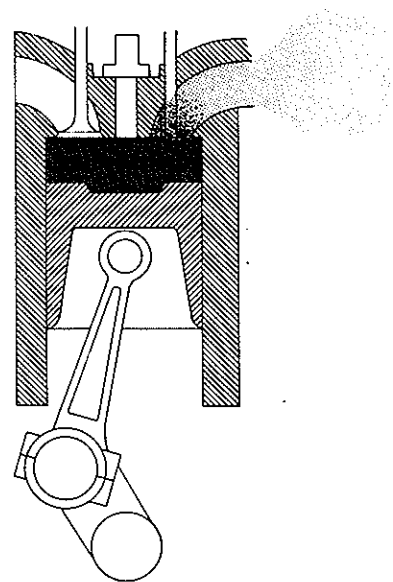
EXHAUST VALVE (DIESEL)
